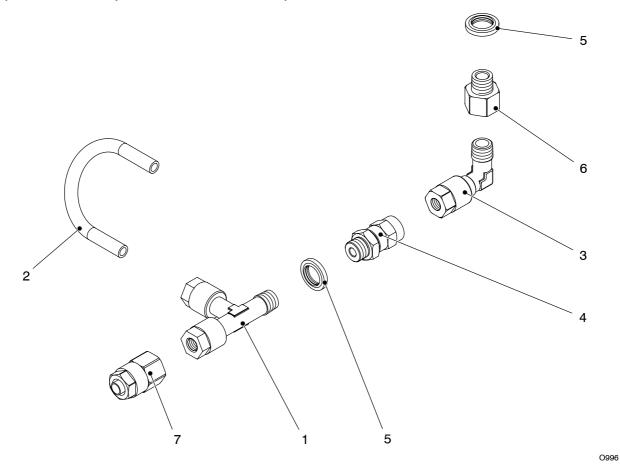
Kit, attachment, for solenoid valve, LS373
